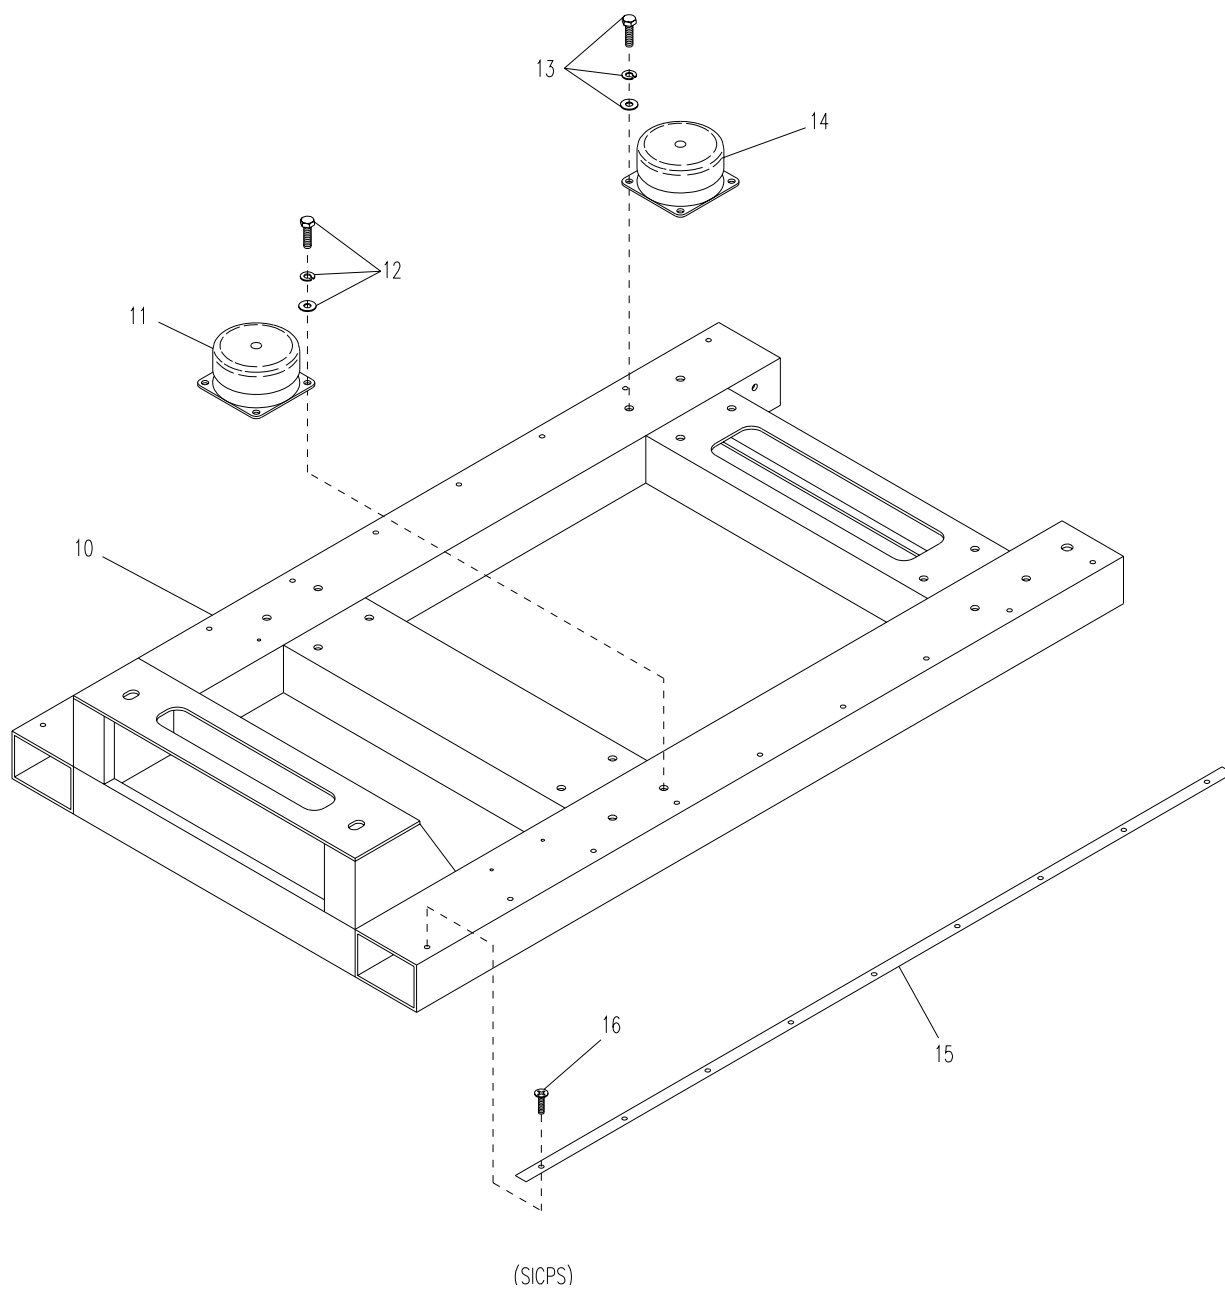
Frame Assembly and Vibration Isolator Mount Assembly (Sheet 3 of 6)
